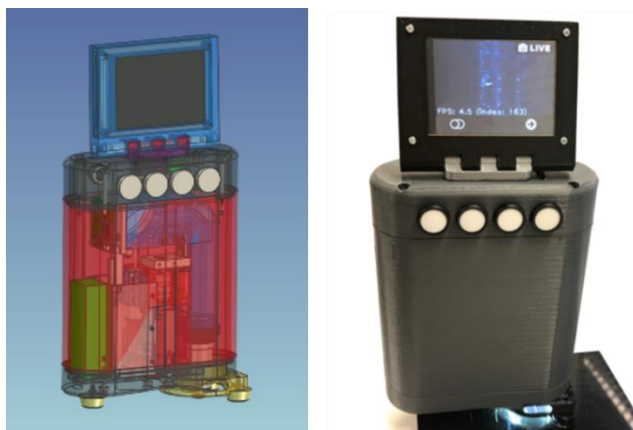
The handheld user-friendly prototype developed for automatic measuring of scratch and dent depth and dimensions.
